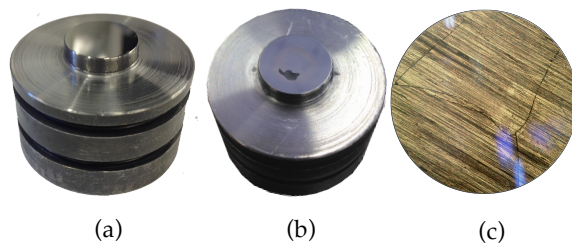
(a) Tungsten carbide platen; (b) Broken tungsten carbide platen, post impact; (c) Cracked surface under microscope.
